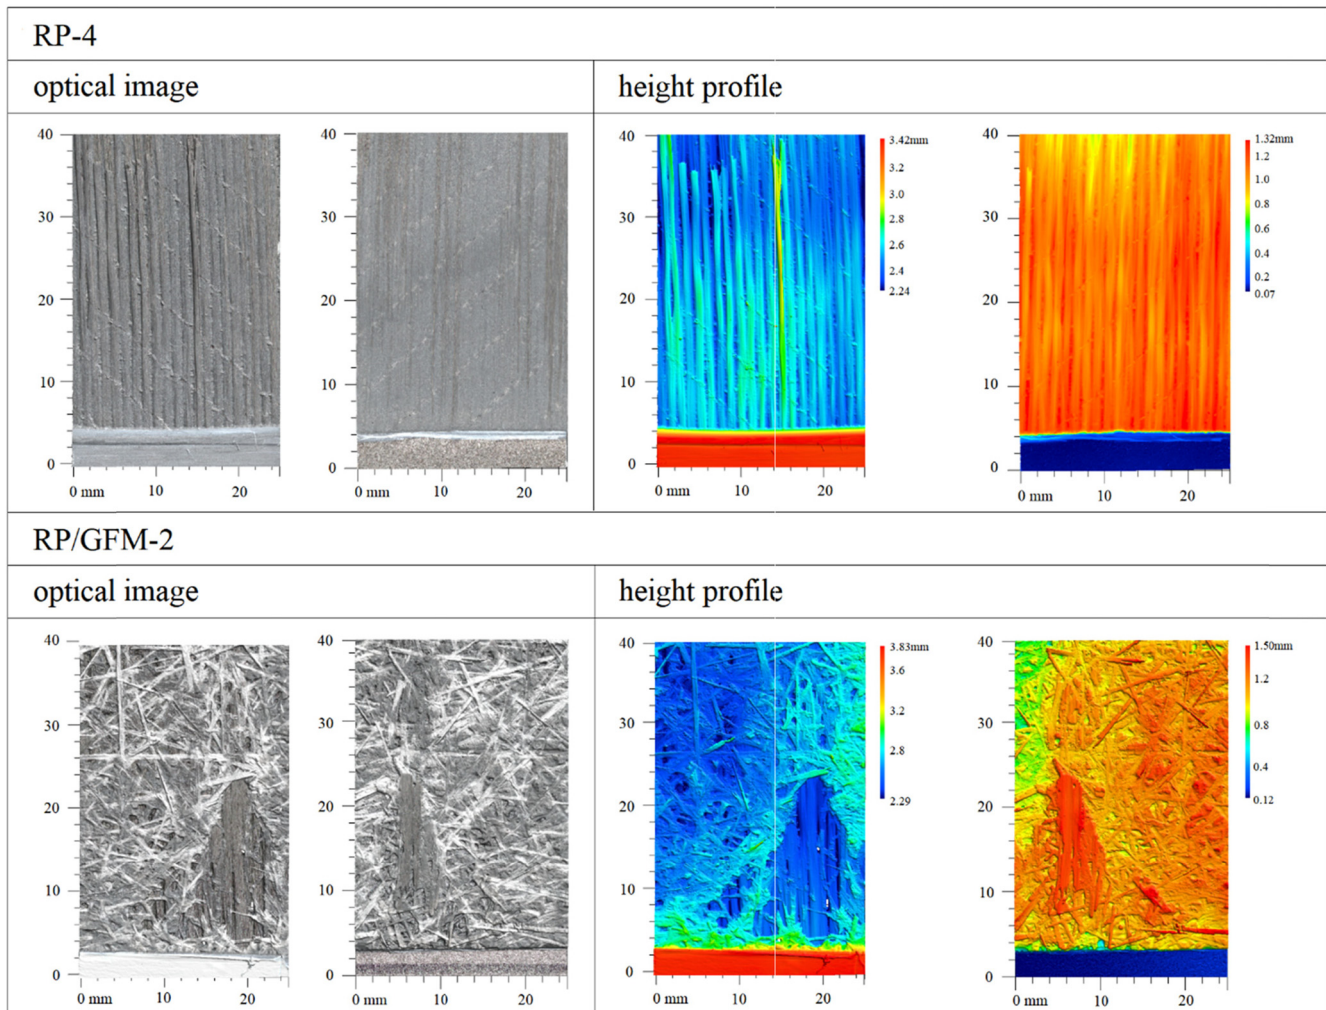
Representative fracture surfaces of specimens manufactured at room pressure under 75% mode II fracture.
